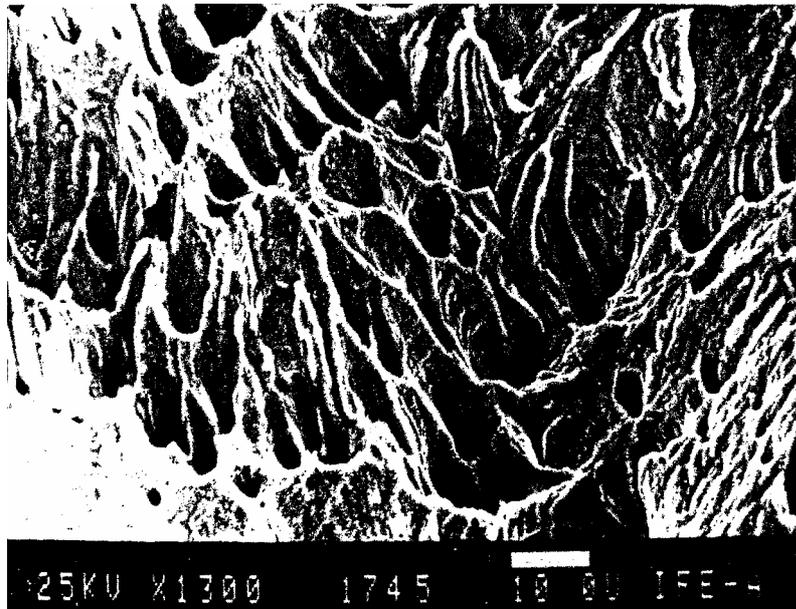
Modified ductile fracture of cold worked FeO-Al₂O₃ specimen hydrogen charged during tensile test
